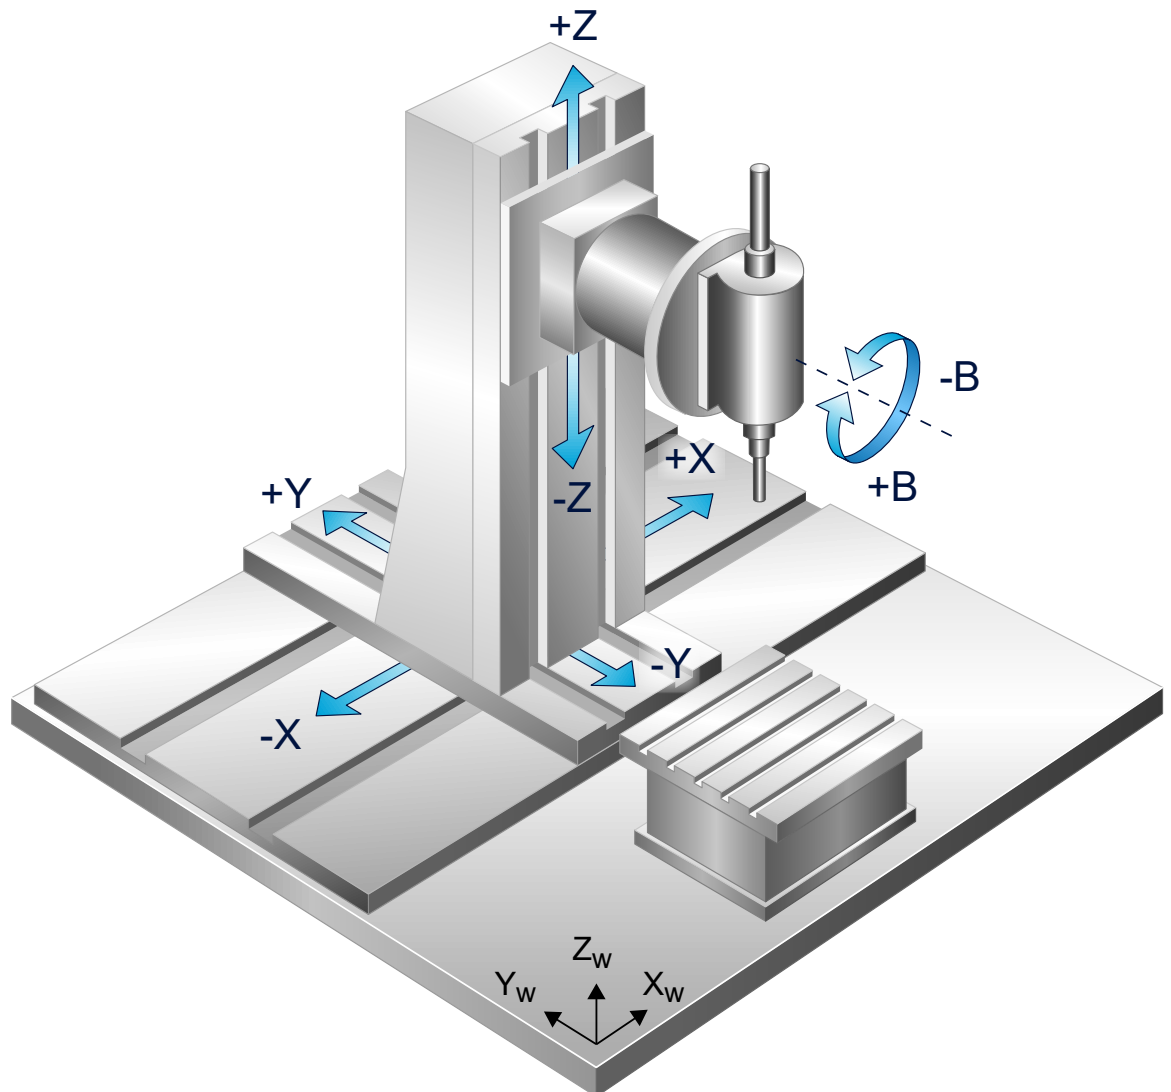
Kinematic structure of the 4-axis milling machine with double spindle head
